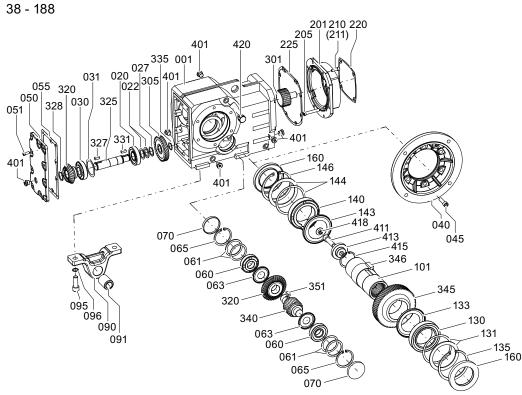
Bevel helical gearbox sizes B38, 38 - 188
